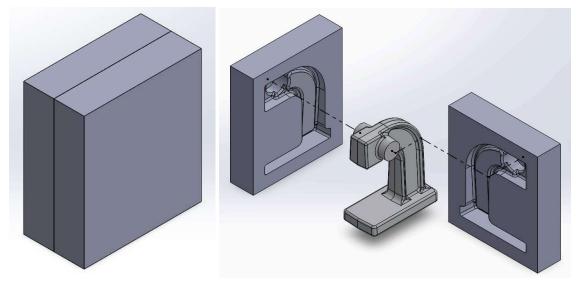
Cavity Mold Assembly (Left) and Exploded View (Right)
